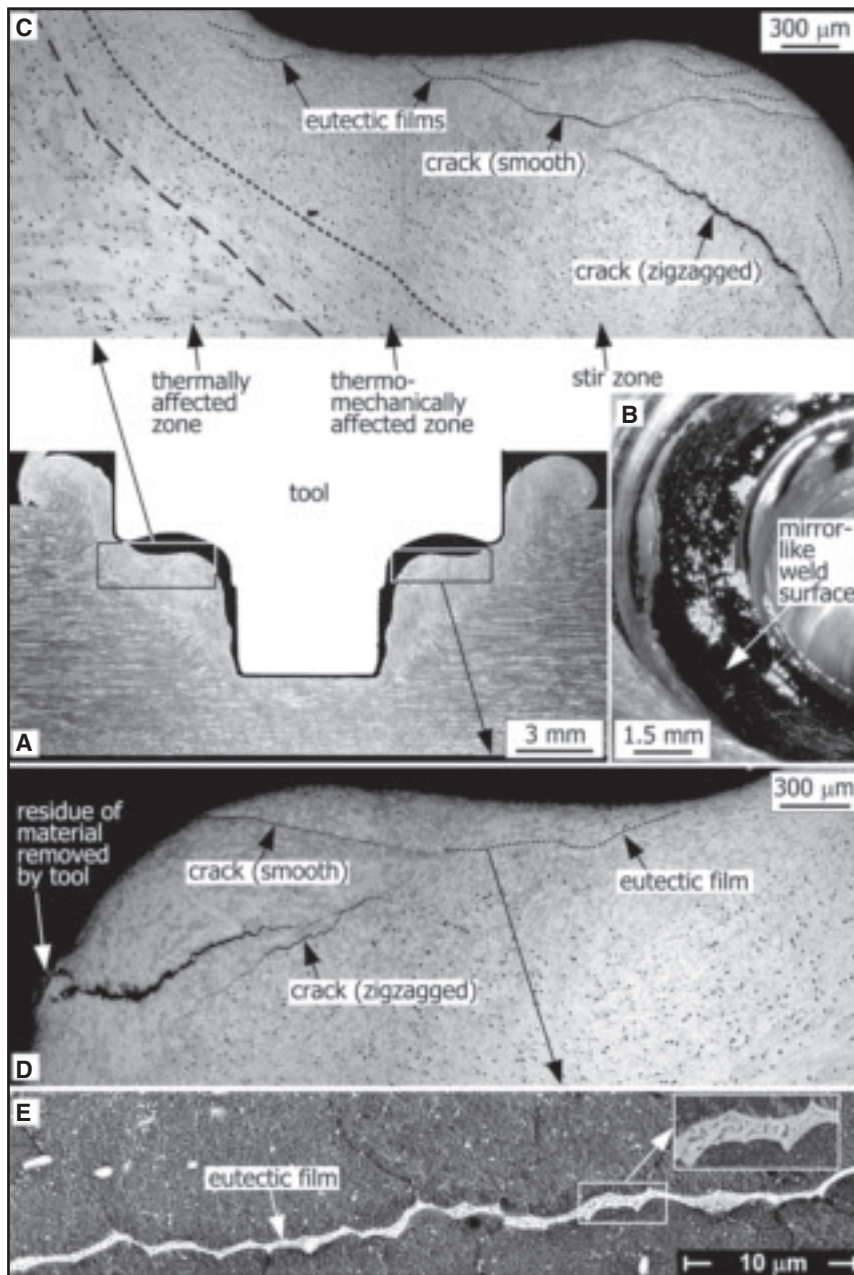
Microstructure below a mirror-like weld surface. A — Vertical cross section; B — mirror-like weld surface; C and D — cracks and eutectic films in stir zone; E — SEM image of eutectic film.
